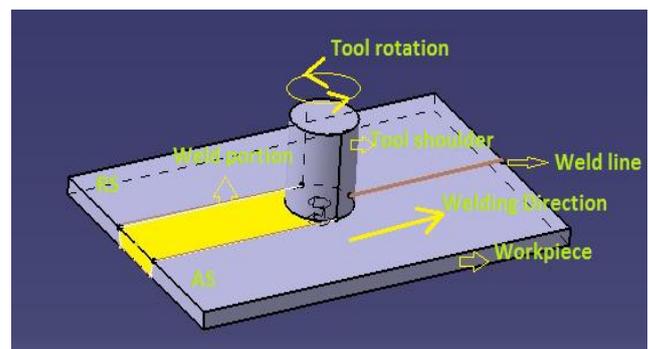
Schematic drawing of Friction Stir Welding
